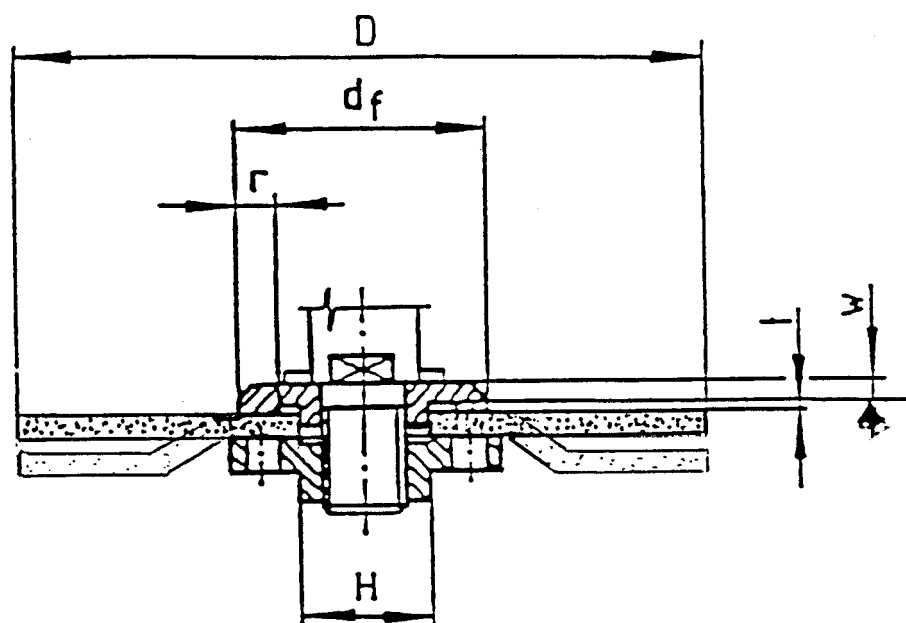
b - Example of flange assembly for reinforced straight cutting-off wheels of type 41 ($D \leq 230$ mm) and depressed-centre cutting-off wheels of type 42
